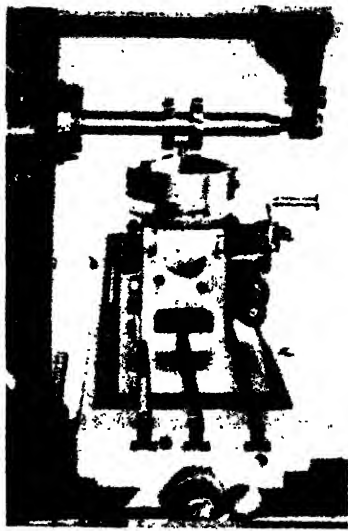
Straddle-milling a bolt head to a sized square. (*The Brown & Sharpe Manufacturing Company*)
